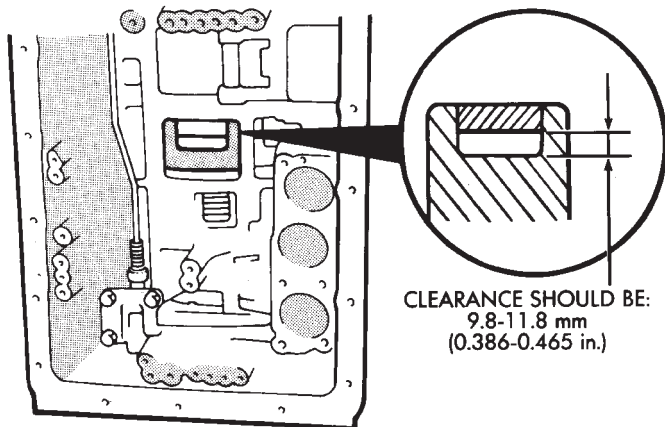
Checking Input Drum-To-Direct Clutch Drum Clearance
